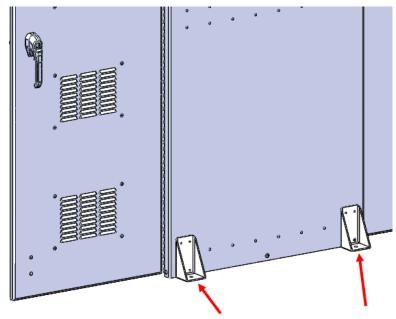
ANCHOR BOLTS (1 SIDE SHOWN)
